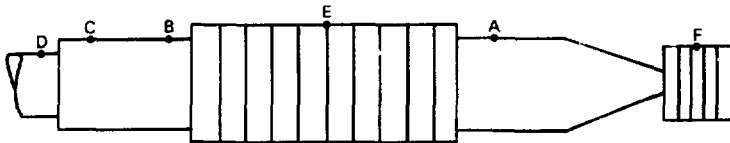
Gages Used for Certifying Threaded End of Penetrators
